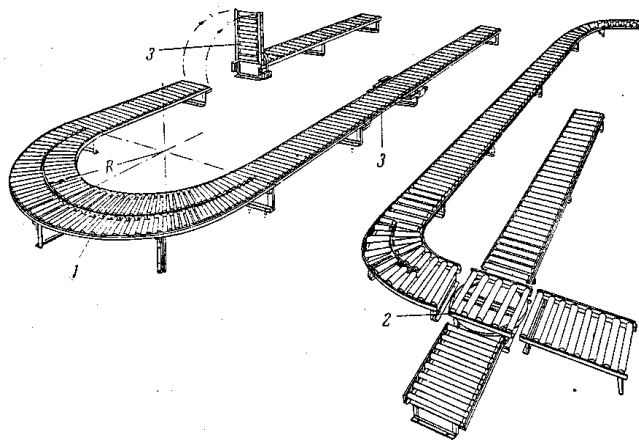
Unpowered roller conveyors with curved section 1, turn-table 2, hinged section 3
